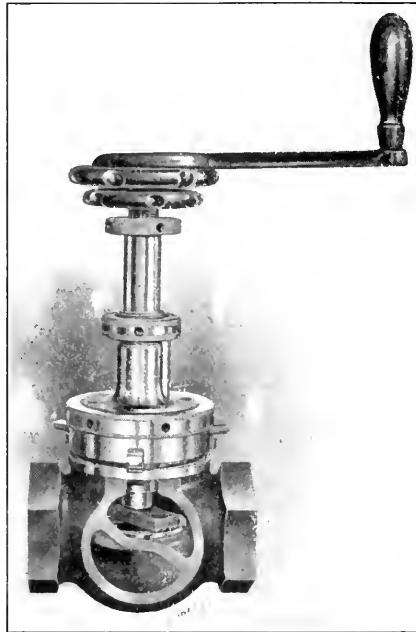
APPLICATION OF DEXTER VALVE MACHINE TO GLOBE VALVES
